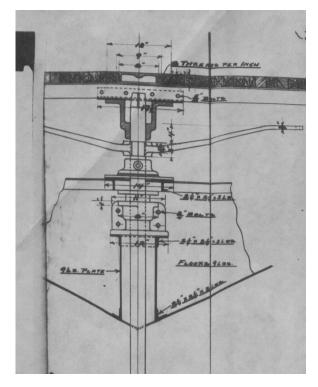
Scan of Pusey & Jones Drawing Showing the Rudder Quadrant, Rudder Tube and Riveted Support Structure. This is Typical of the Detail Plans Available for the Restoration
